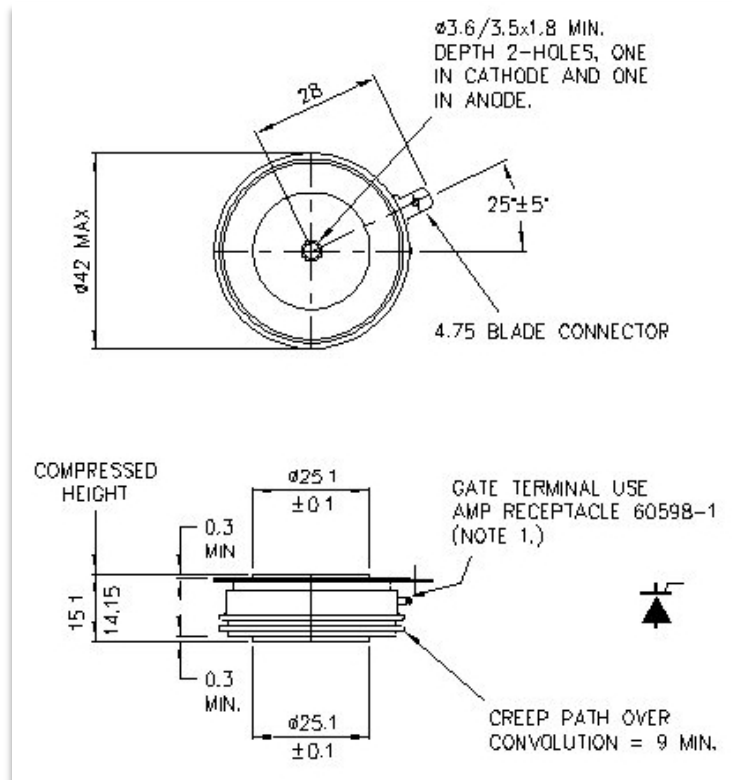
Typical Outline Drawing of a Capsule-type Thyristor
